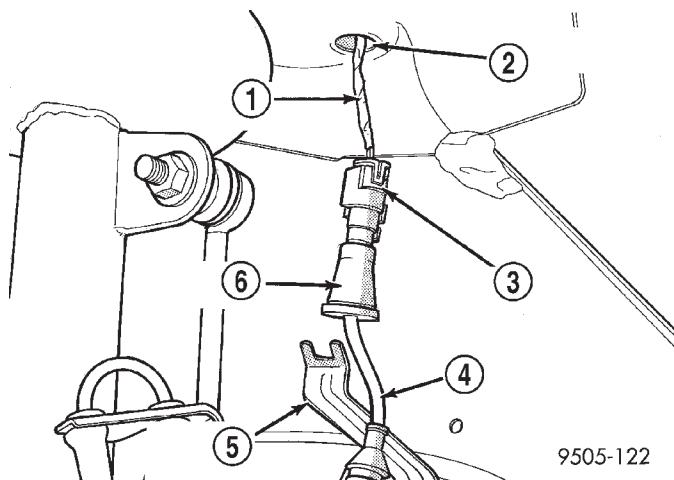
Speed Sensor Cable To Vehicle Wiring Harness
